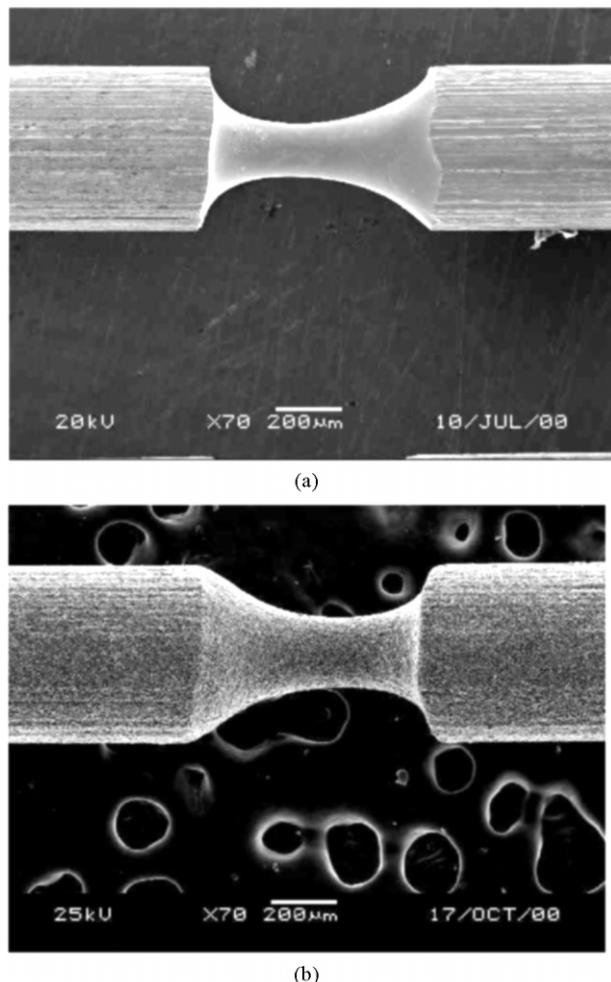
(a) Convergent–divergent nozzle shape around the tungsten wire with 217- μm throat diameter. (b) Micrograph of a nozzle shape tungsten mold coated with continuous diamond film.
